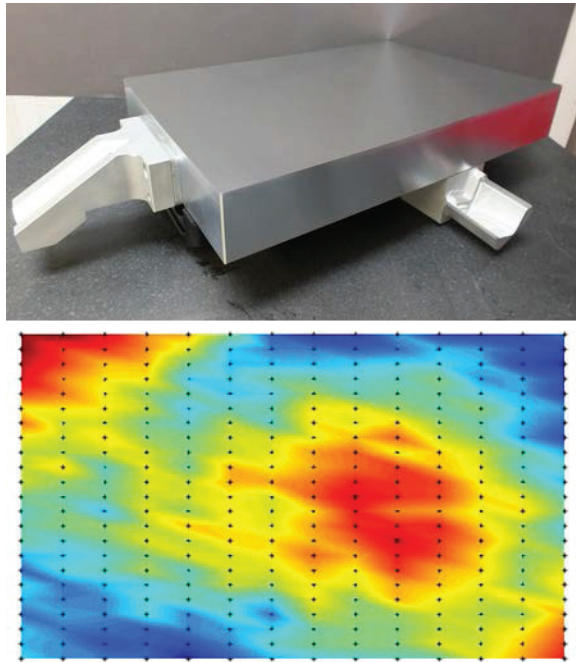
Machining result: head-up display master (dimensions $350 \times 250 \text{ mm}^2$) – master workpiece (top), surface description (bottom)
